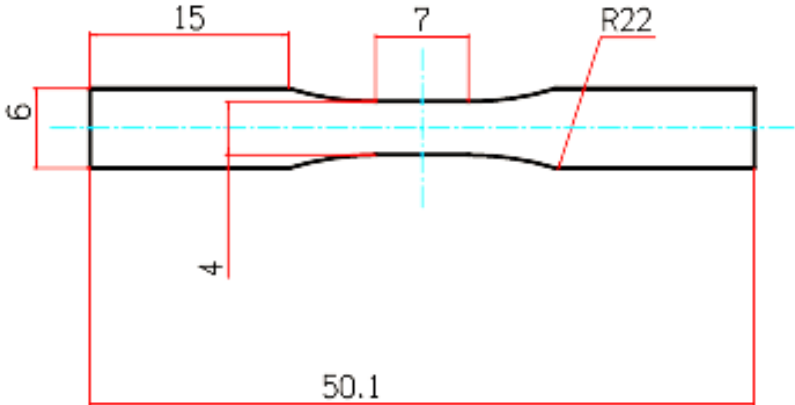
Geometrical measurements of specimens used for tensile testing.
